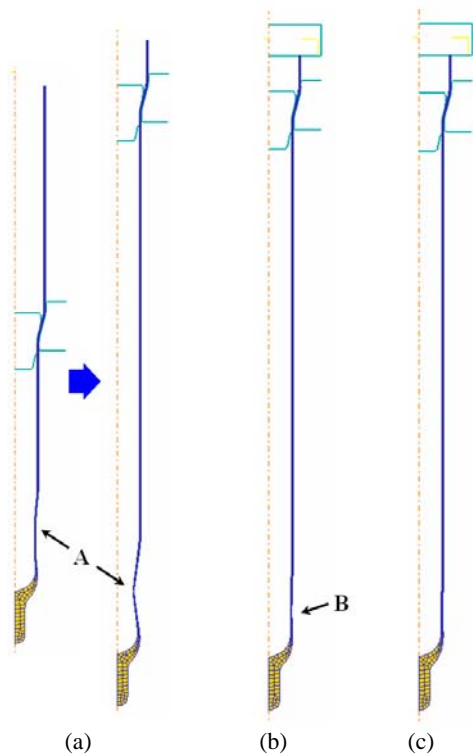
The deformed geometries obtained by CAE analyses: (a) conventional tube drawing and (b) combined drawing with compressive force of 15kN and (c) 45kN
